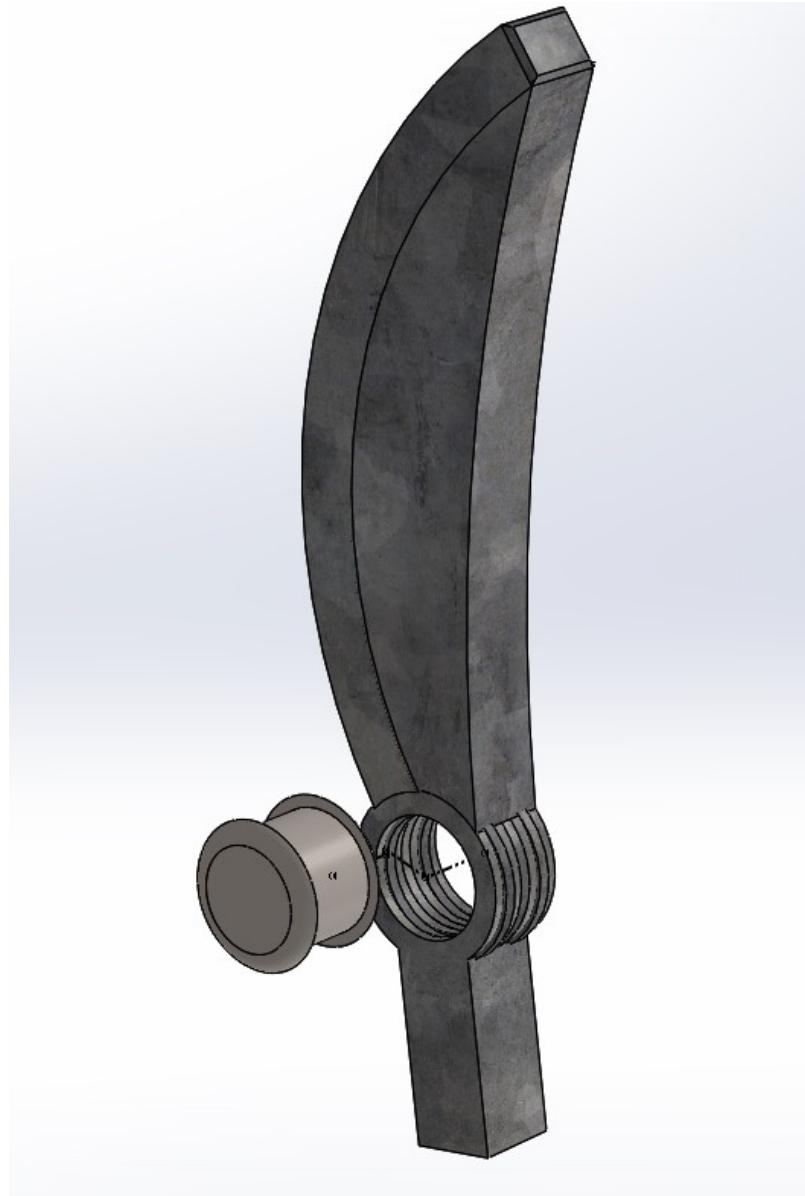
Sackett, Justin: Assembly Step 4
